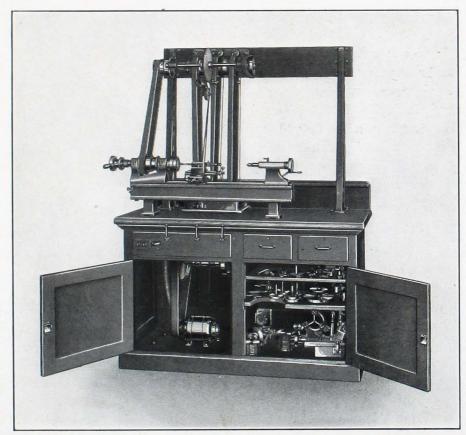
Lathe on Oak Cabinet with Individual Motor Drive.
